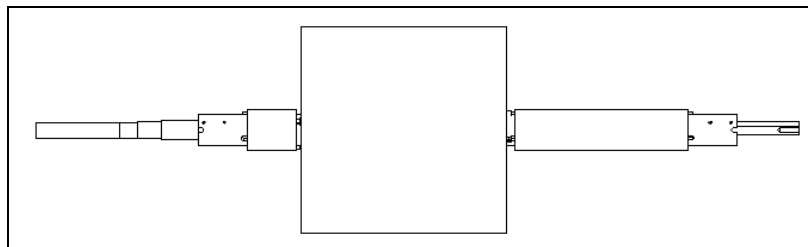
One Reel Mounted on the Shaft, sides cover with Dummy Core to avoid damage to Rubber Bladder.
